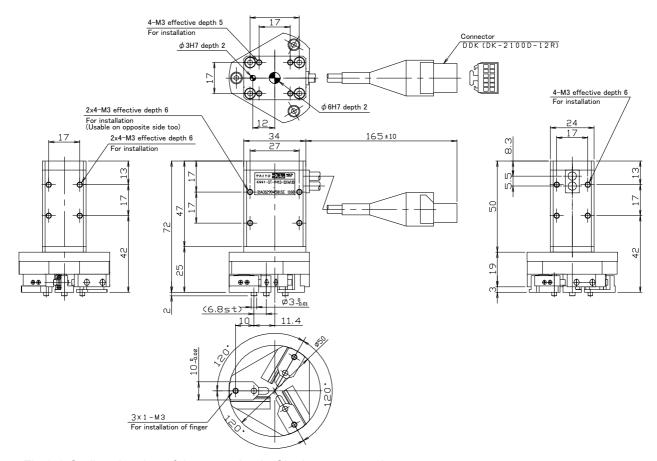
Outline drawing of the control unit (Single cam type 3)
